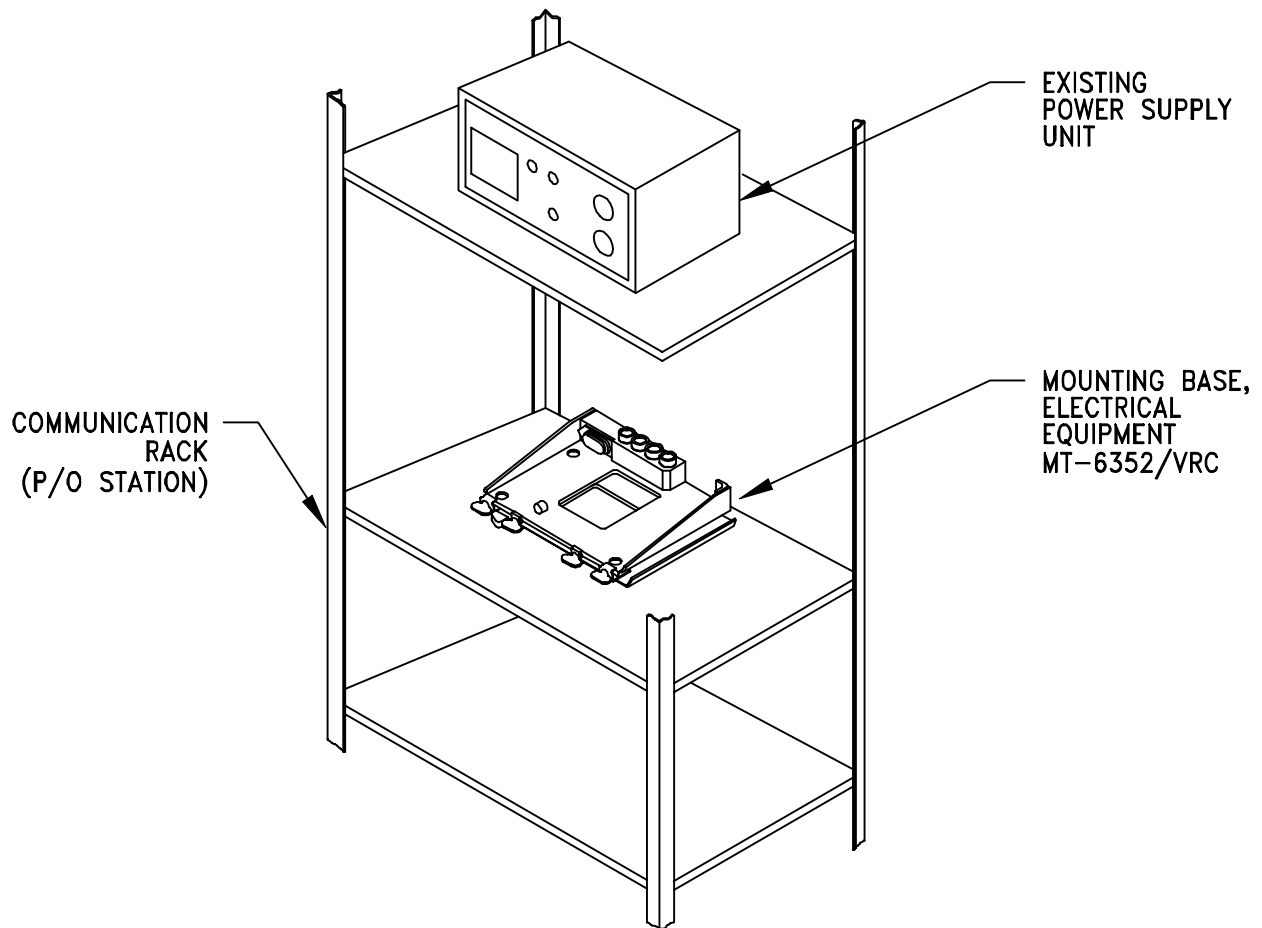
(1). MK and Radio Installation: MK Equipment Locations (Typical)
